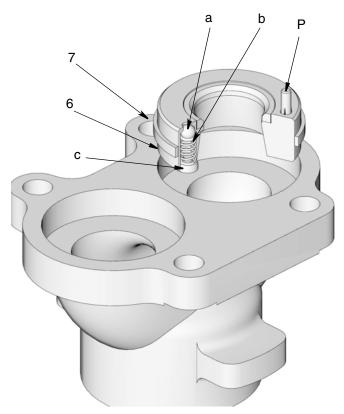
Inlet Seat with Pressure Relief Valve (Left side is shown as the back of this illustration)
